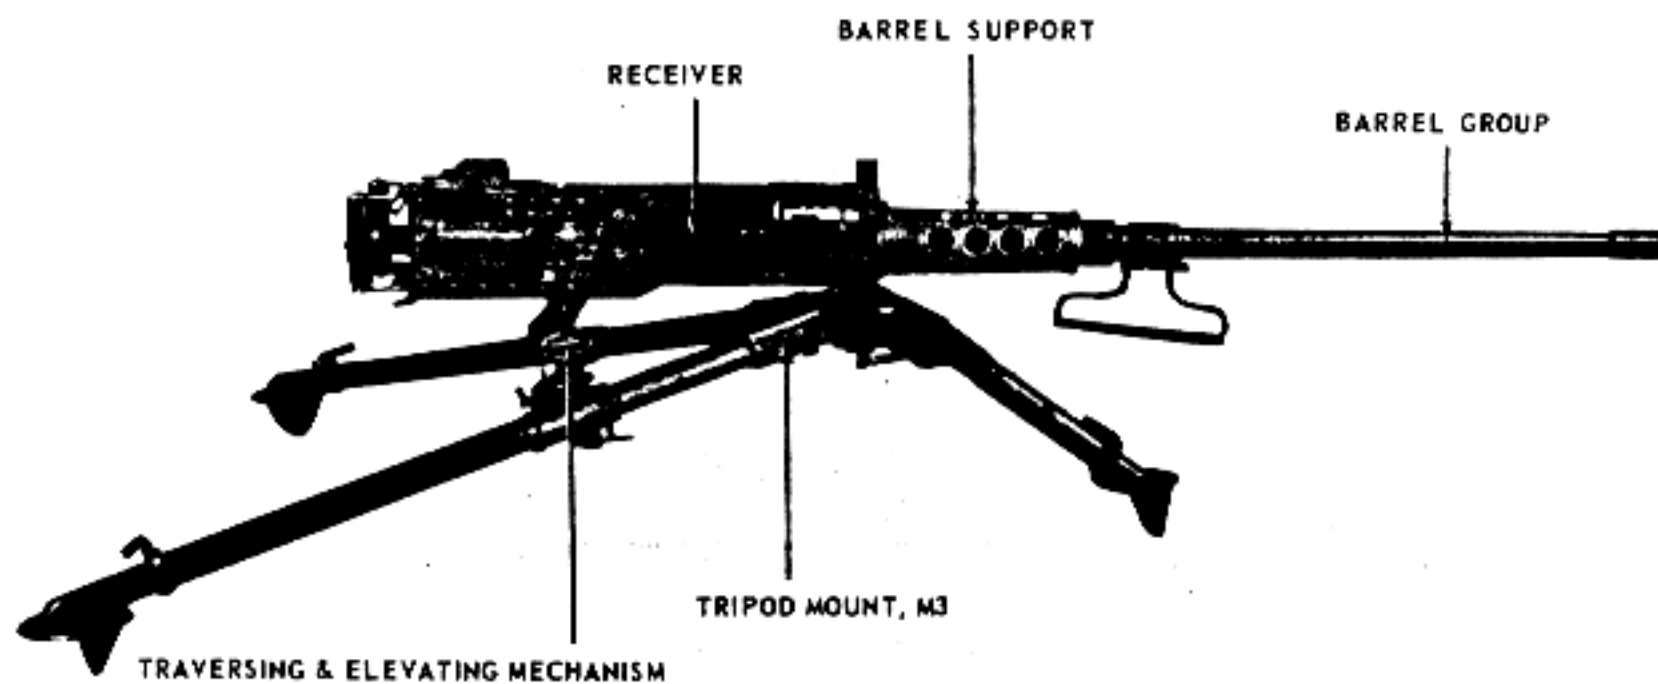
Browning machinegun, cal .50 HB, M2 on tripod mount, M3.
